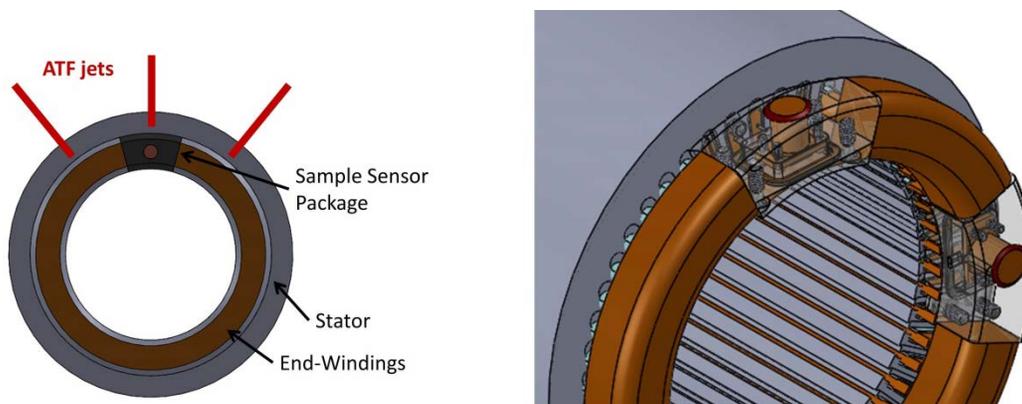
Illustration of sensor package installed in end winding (left), three-dimensional drawing of stator end winding with sensor package installed for convective heat transfer measurements (right)
